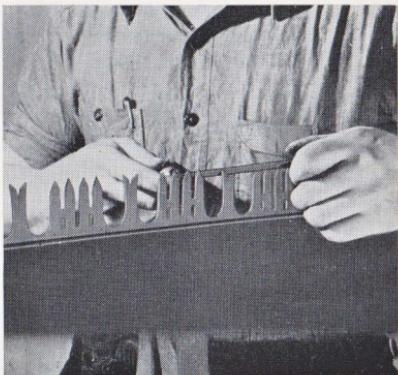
Sharpening raker tooth on large Crosscut Saw
